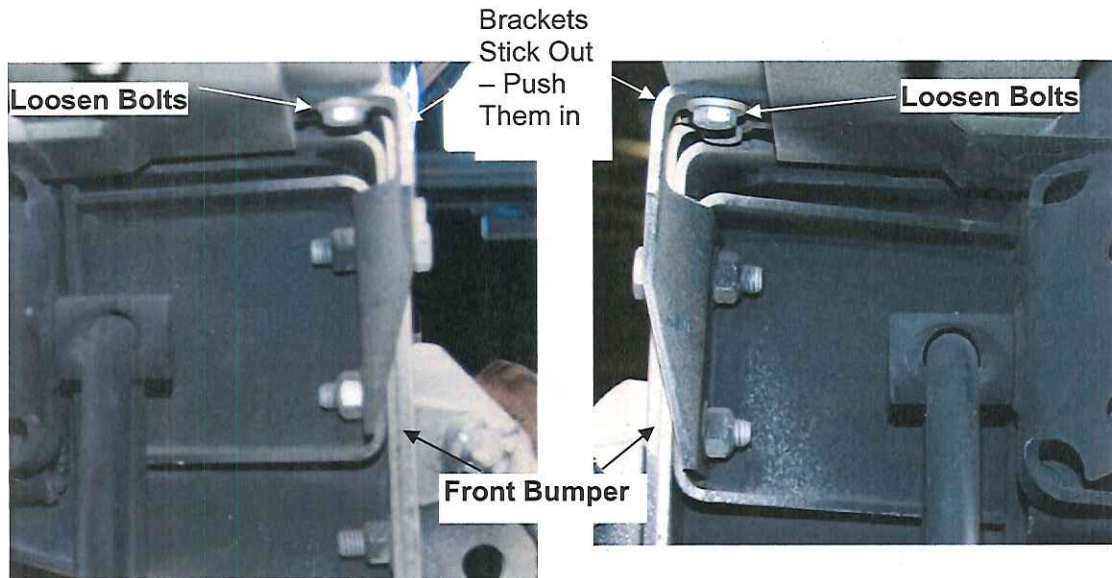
PASSENGER-SIDE GRILLE SUPPORT STICKING OUT PAST FRONT BUMPER/ WINCH PLATE
